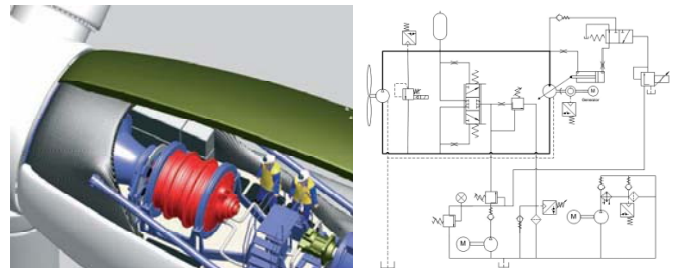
Hydrostatic drive without mechanical gearbox [7]
